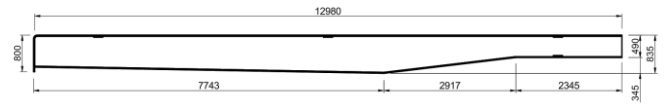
Detailed engineering drawing of the redesigned web flange subframe
